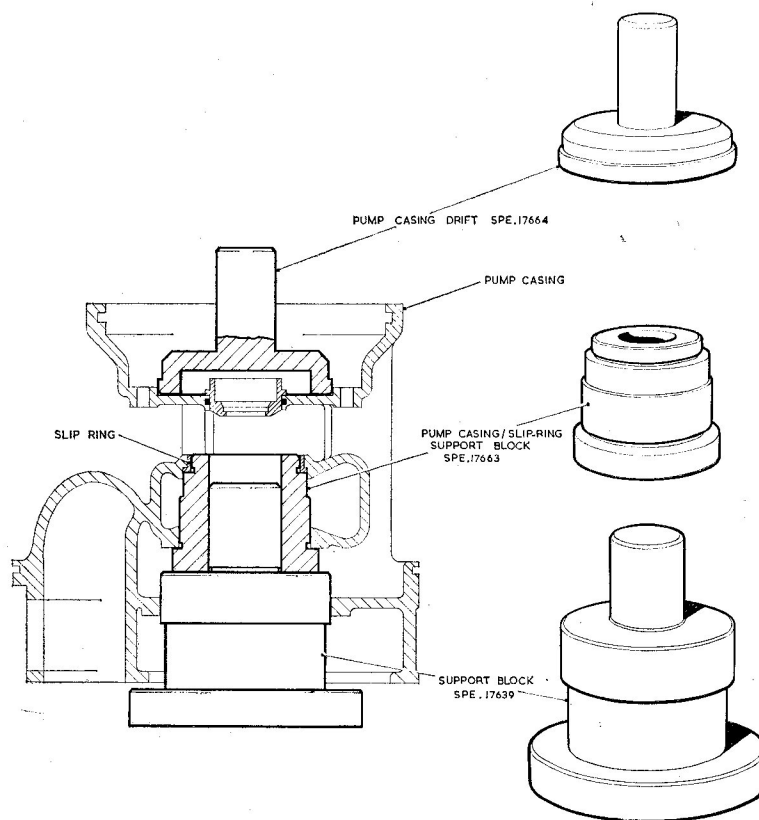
Tools for assembling the upper impeller slip-ring into the pump casing
